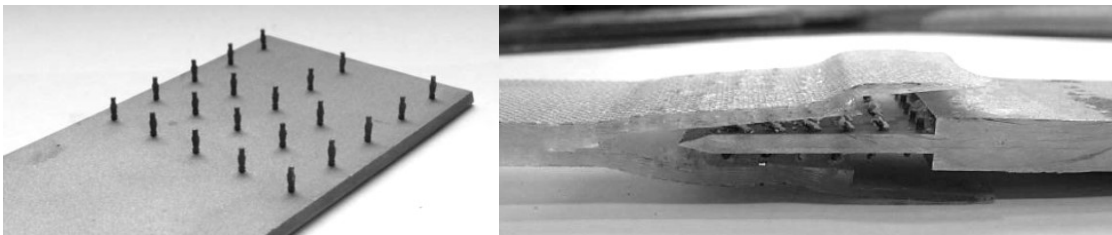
Failure mode for double lap joints with pins, produced via additive layer manufacturing techniques [60]
